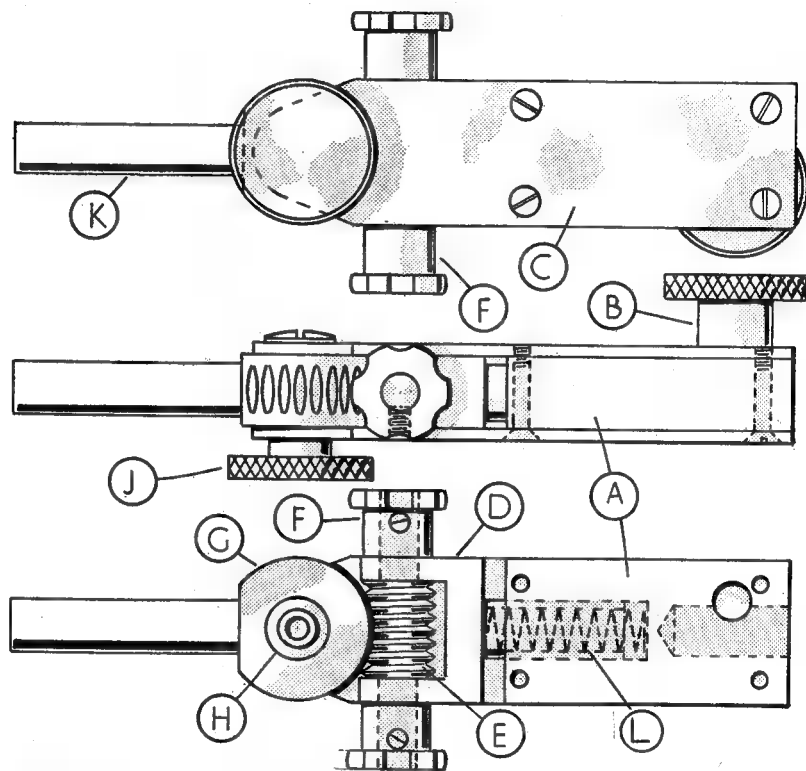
"A"—the body; "B"—the clamp cotter; "C"—the side plates; "D"—the worm shaft fork; "E"—the worm shaft; "F"—the finger wheels; "G"—the worm wheel; "H"—the worm wheel spindle; "J"—the locking-screw; "K"—the mounting spindle; "L"—the worm fork spring
